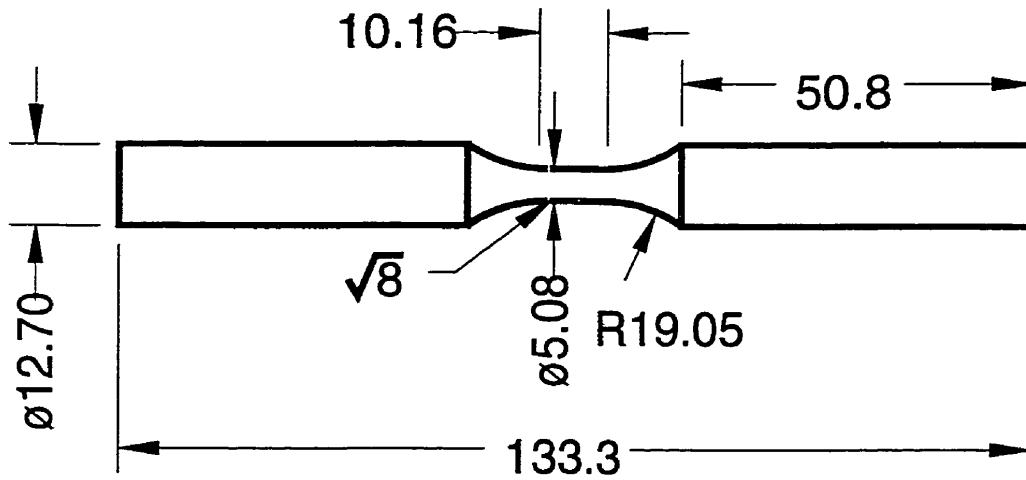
Uniaxial Specimen. All dimensions in mm.
